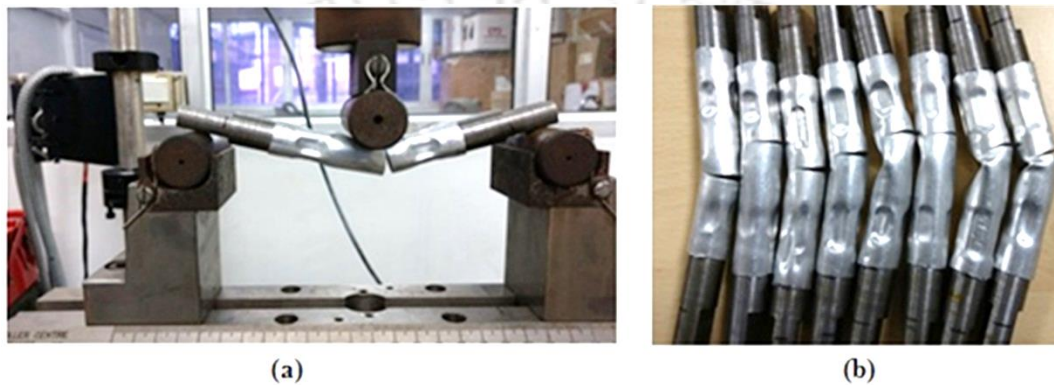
Three-point bending (a) setup and (b) failure mode
